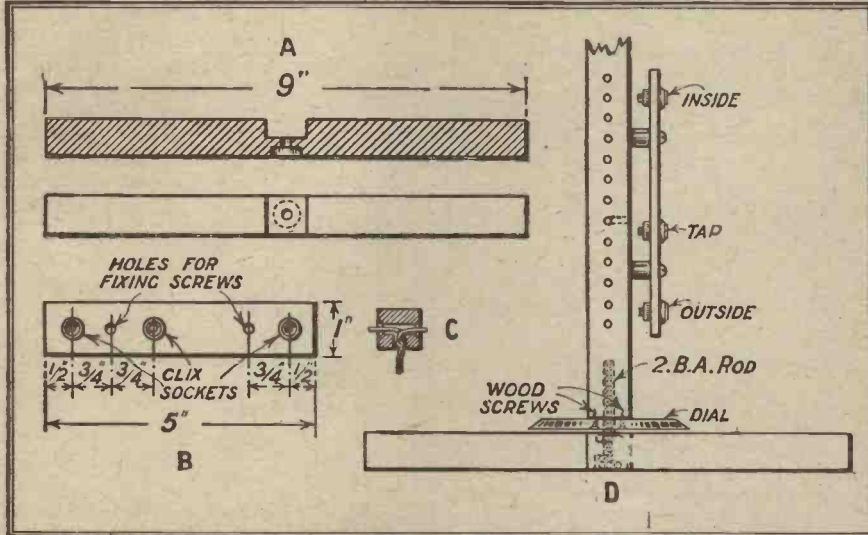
More constructional details are indicated in these four scale drawings, which show the base, socket strip, tapping and general assembly respectively.
